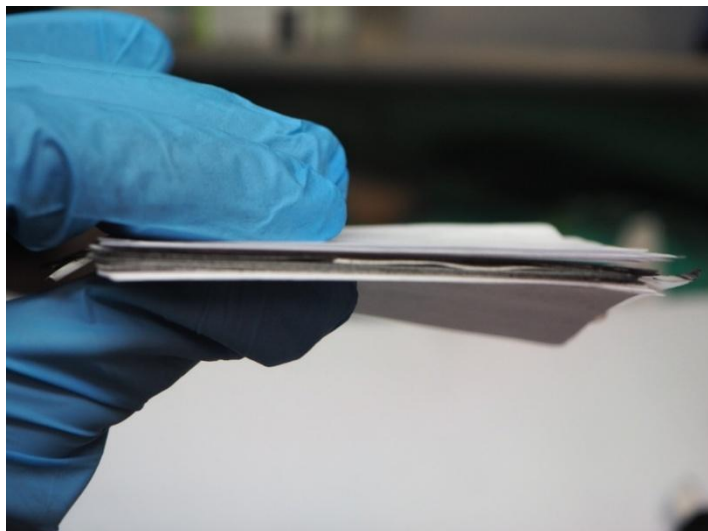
DUT ES26-42:1 after disassembly, the electrode stack
